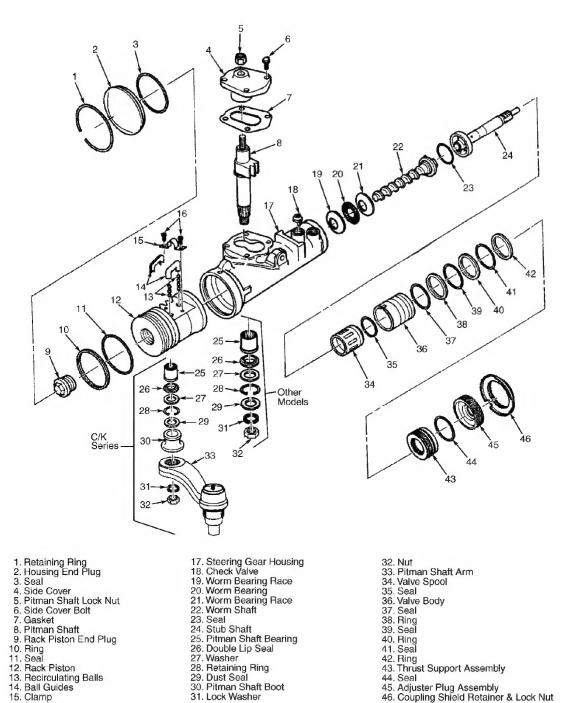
Exploded View Of Power Steering Gear Courtesy of GENERAL MOTORS CORP.
